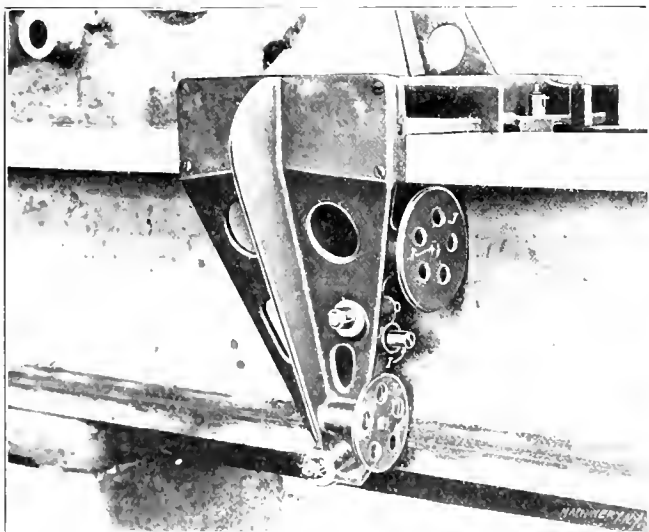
Testing the Bed for Clearance for Revolving Parts in the Apron.
